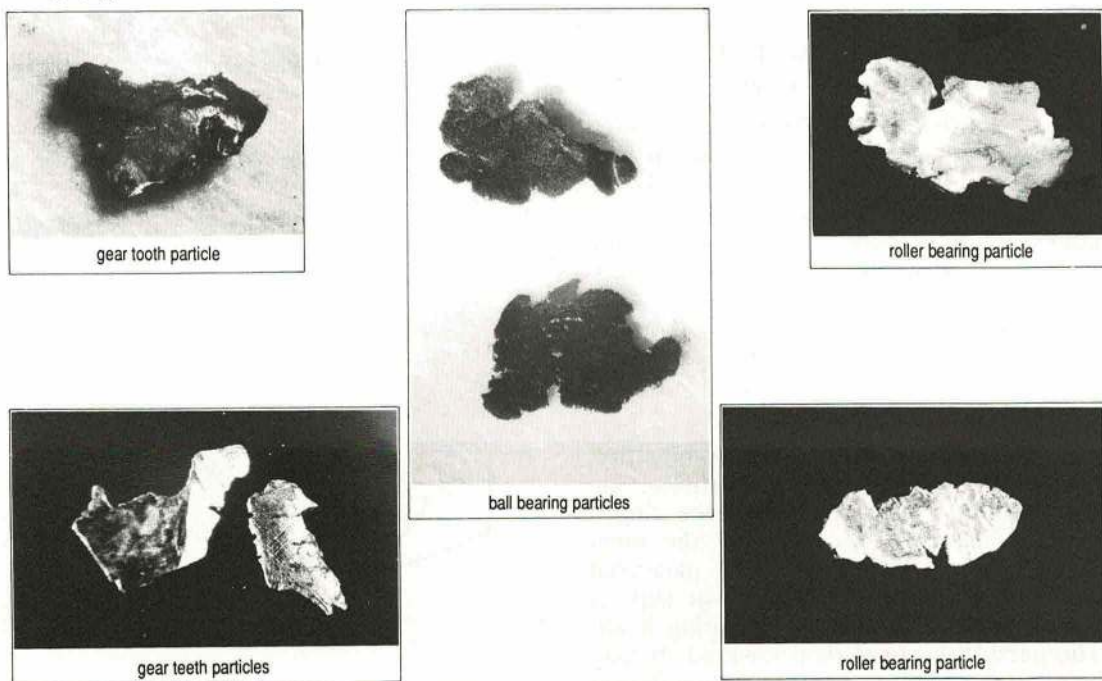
Magnified metallic debris particles – engine and gearbox oil systems
